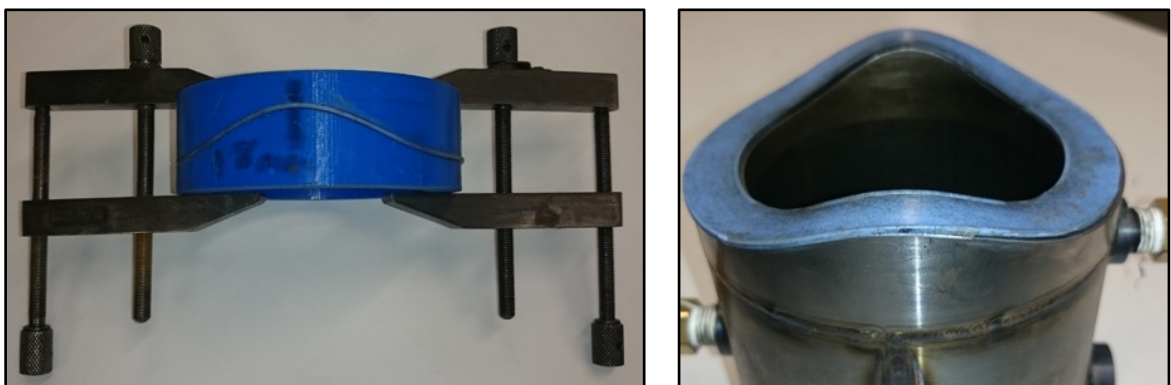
Photographs demonstrating how clamps and 3D printed parts are used to shape the PTFE-based gaskets (left), and the resulting shape of the gasket matching the curved profile of the cylinder liner (right).
